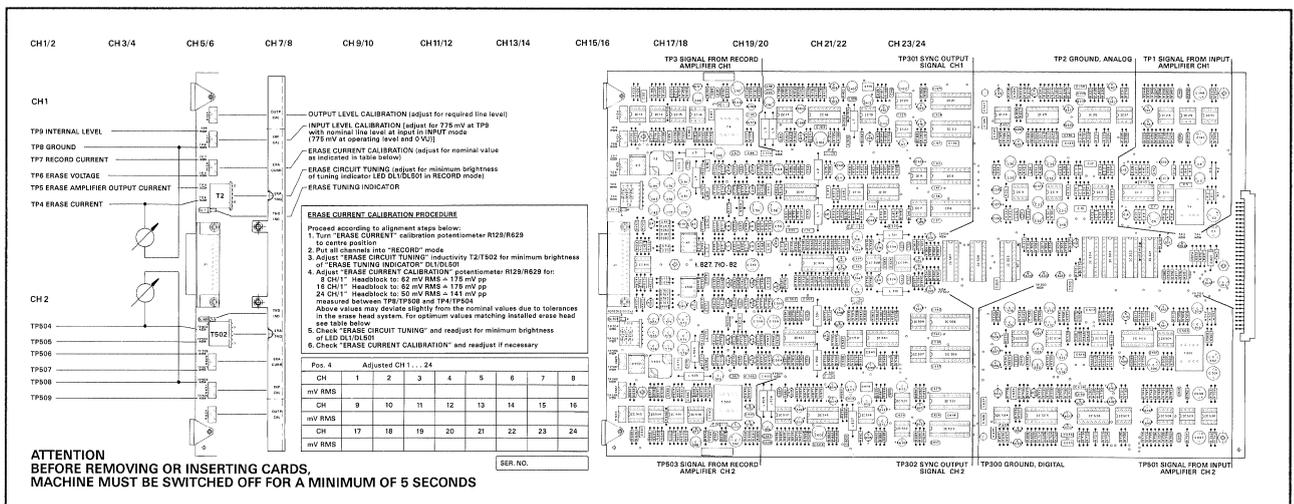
AUDIO ELECTRONIC PCB 1.827.710.xx
